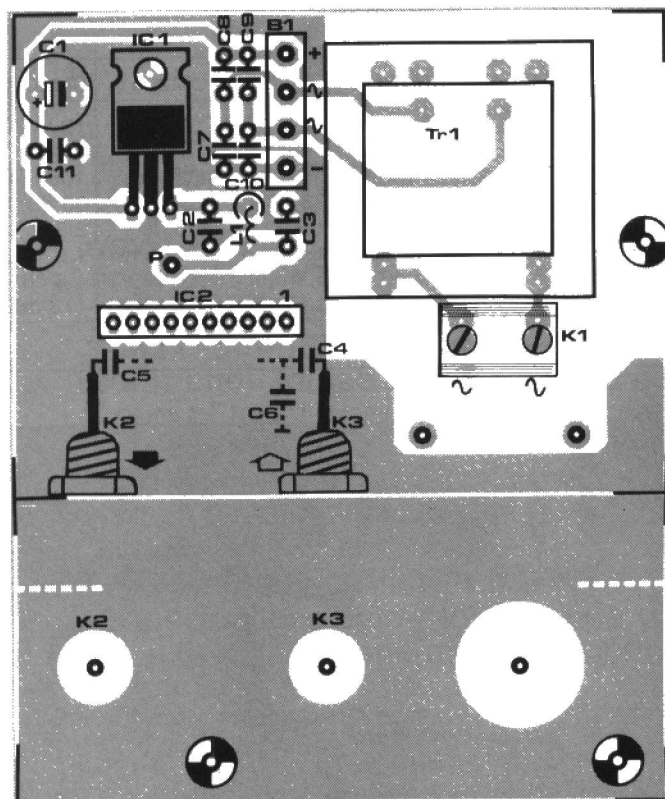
Component mounting plan of the double-sided printed circuit board.
